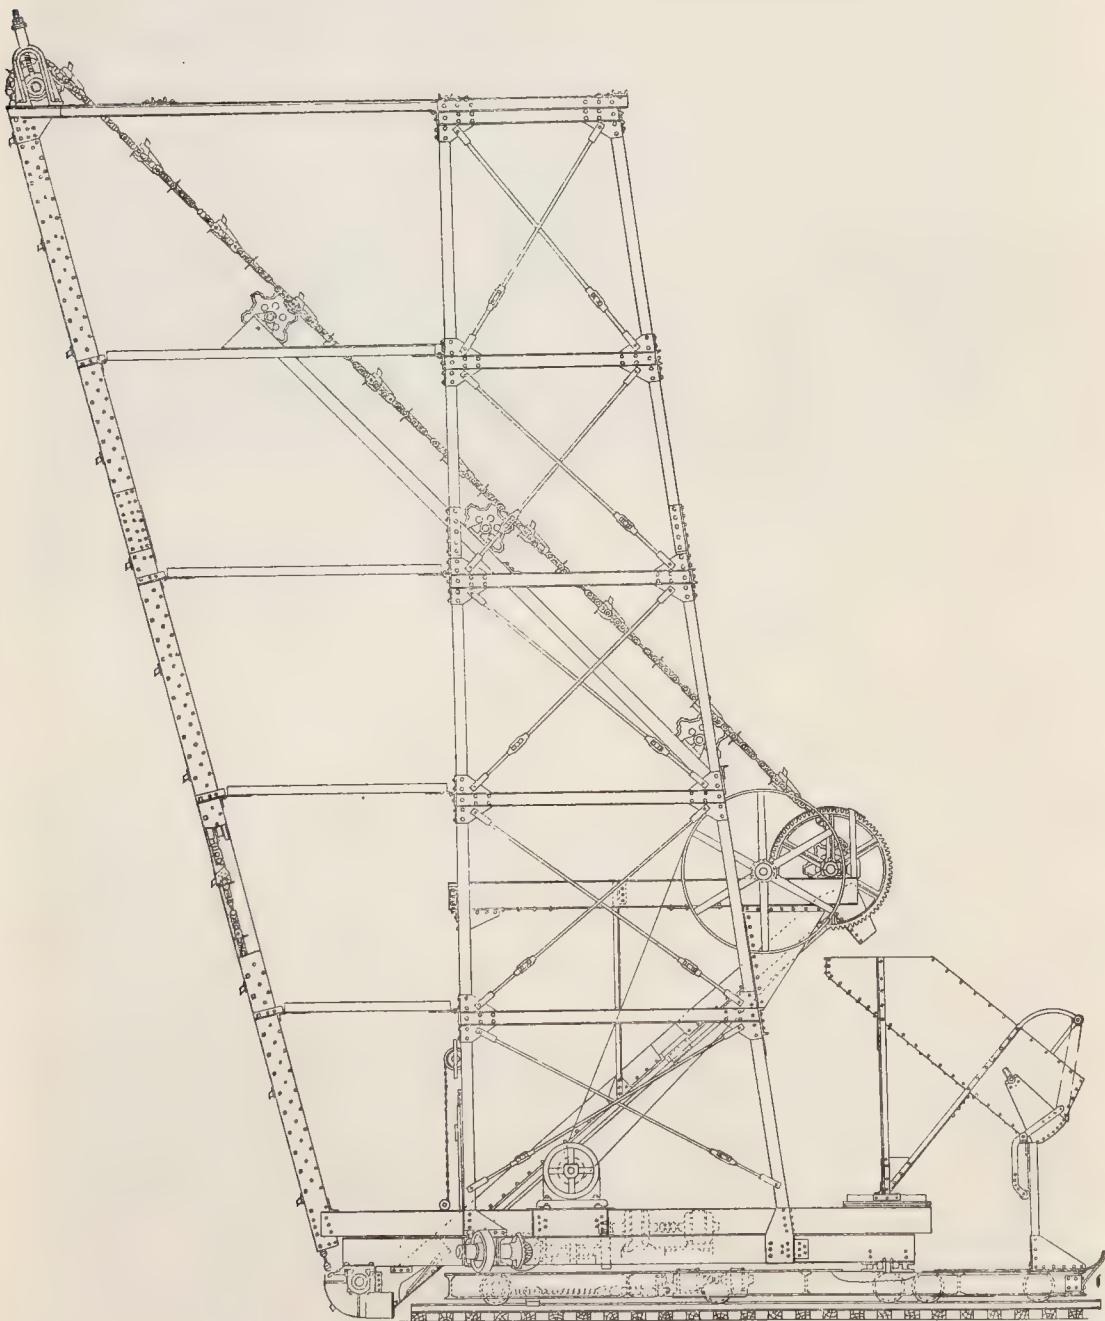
Side elevation of 45-foot Eagle shale-planer.
